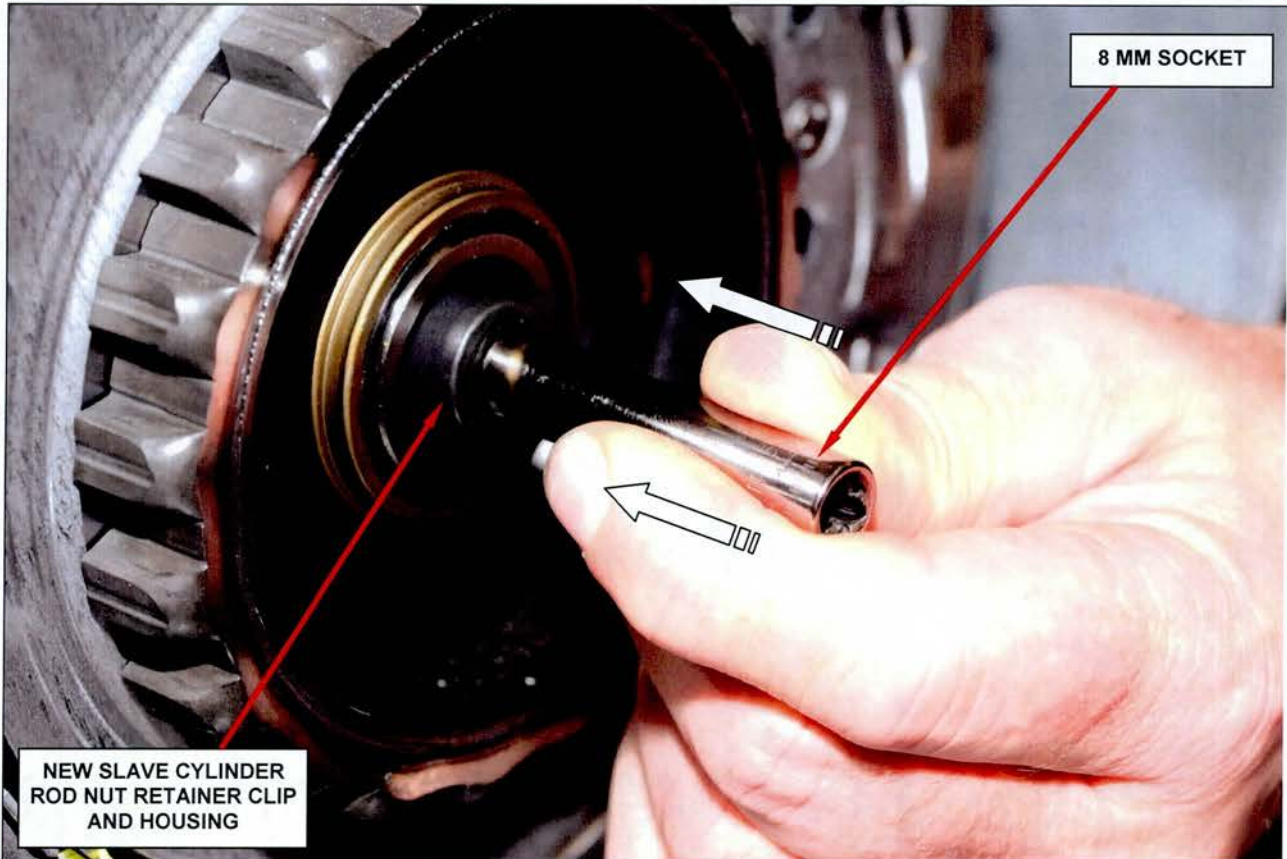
Push the New Slave Cylinder Rod Nut Retaining Clip and Housing with an 8mm Socket
